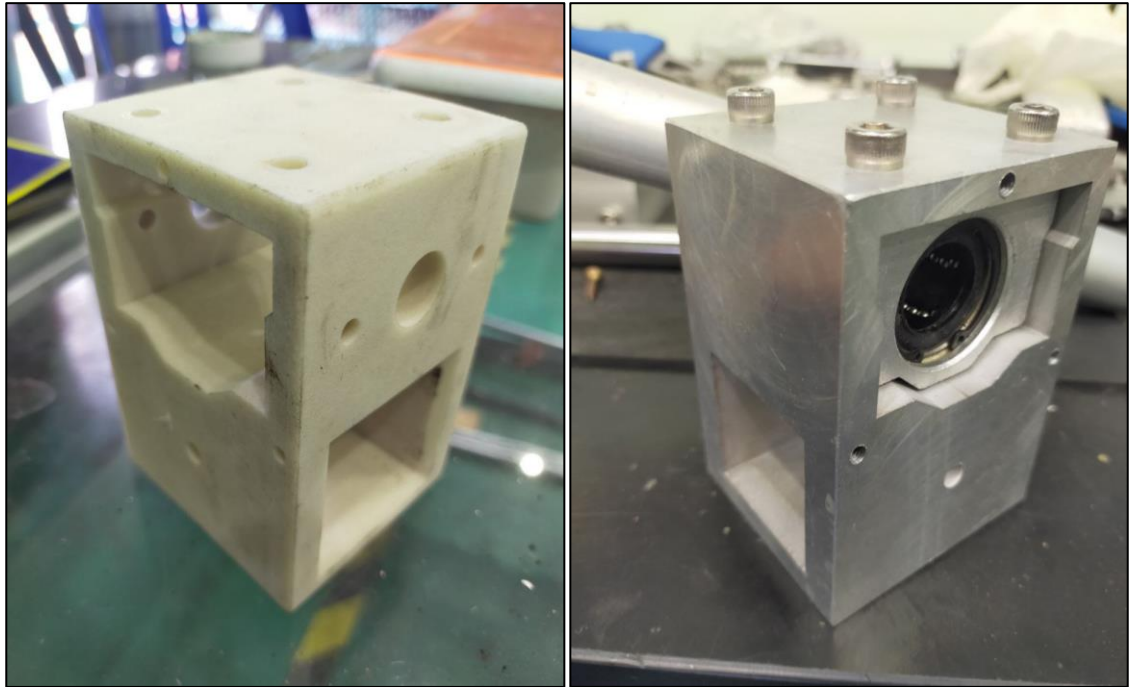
Shaft mounting block, left picture was SLS 3D printed, and right picture is stainless steel wire-cut.
